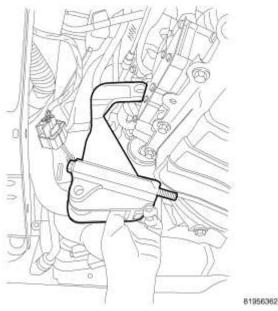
Identifying Bracket For Mount Courtesy of CHRYSLER LLC
